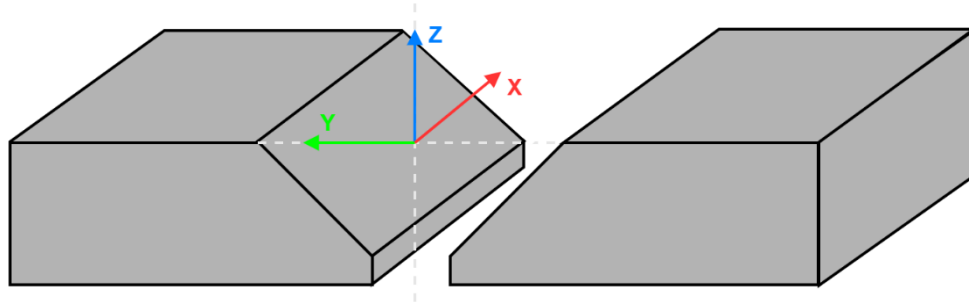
Calibrated weld path coordinate system with respect to workpiece and weld groove.
